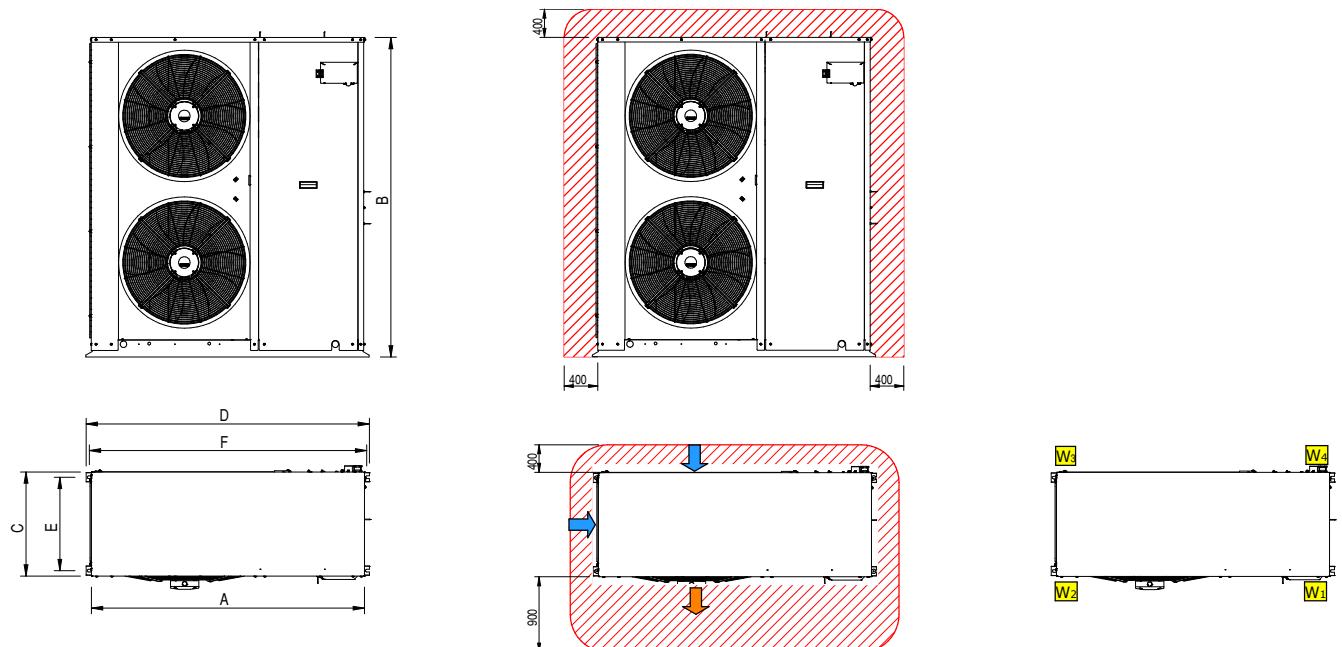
dimensional drawing sizes 27Y, 35Y and 40Y
